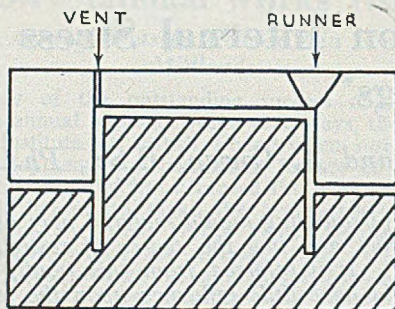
Cross-section through Moulding Box showing Moulding Technique for Hollow Cylinders.
